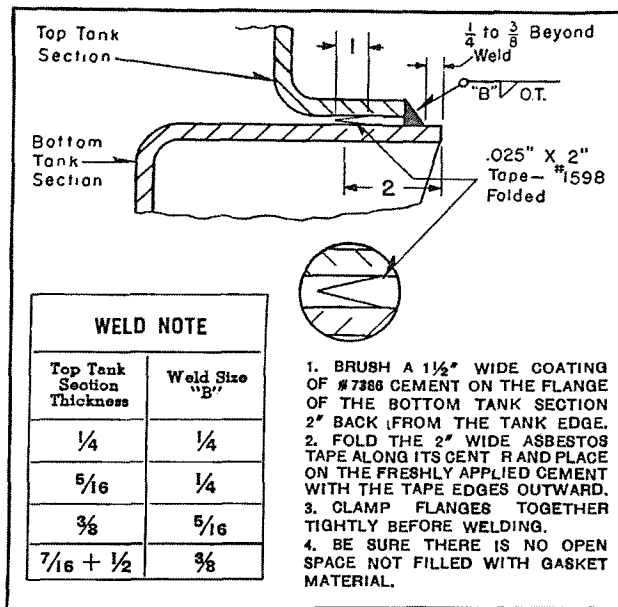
Joining of Flanges, "Form-Fit" Tank
